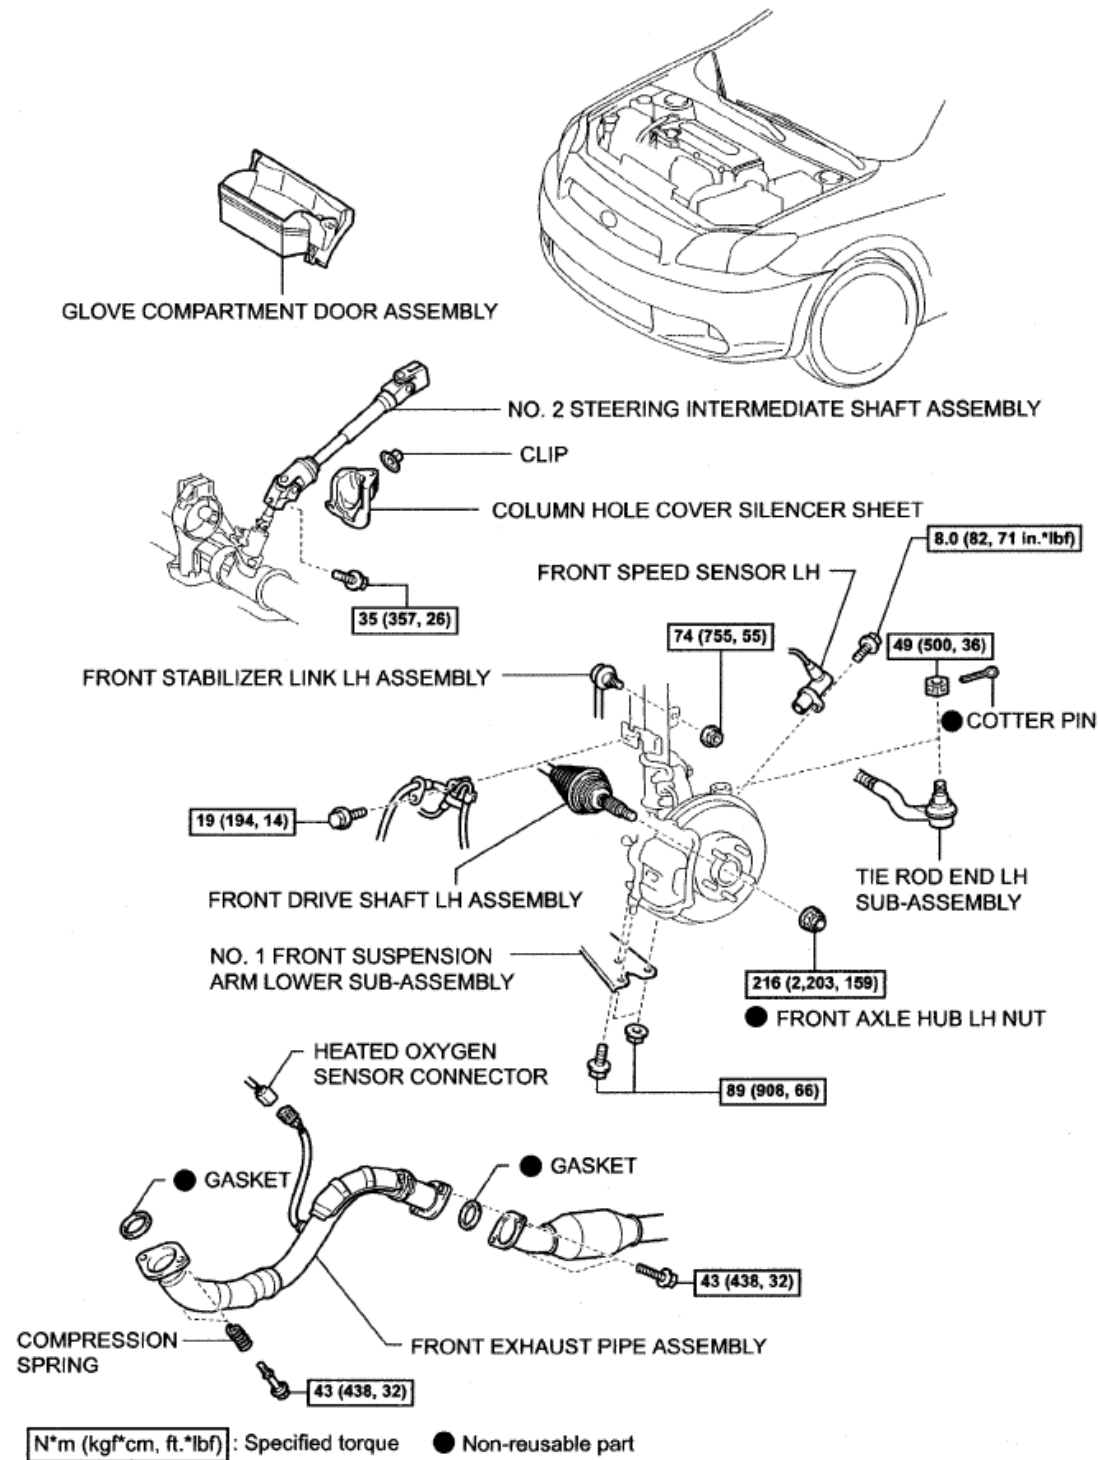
Identifying Engine Assembly Components With Specification (4 Of 11)
